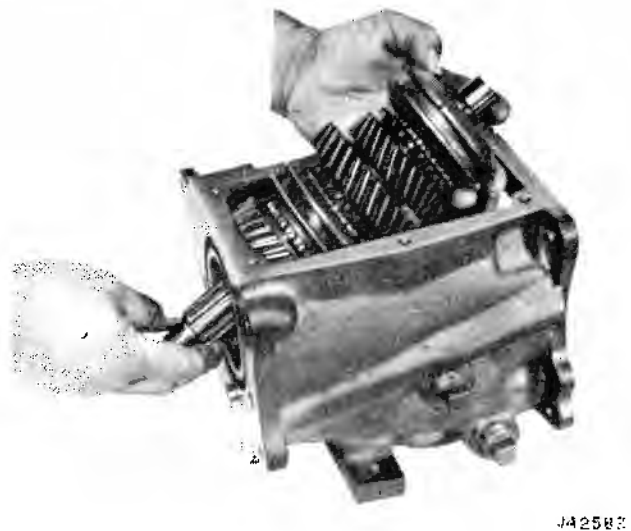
Mainshaft Gear Assembly - Removal and Installation
